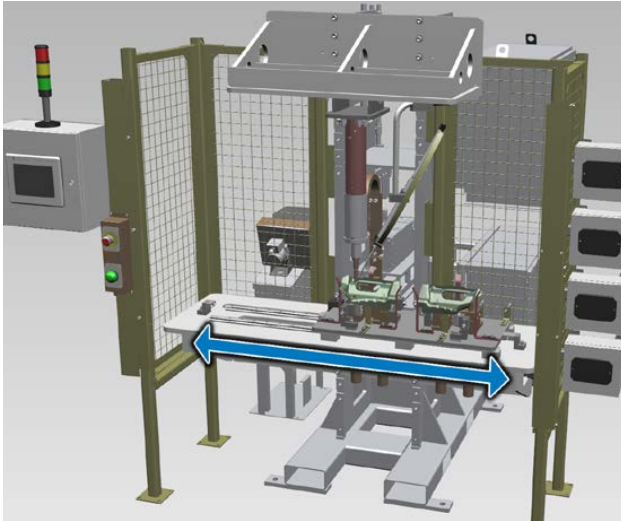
Projection weld actuator and ServoPlace actuator fixed and rodless linear actuators move parts into position.
